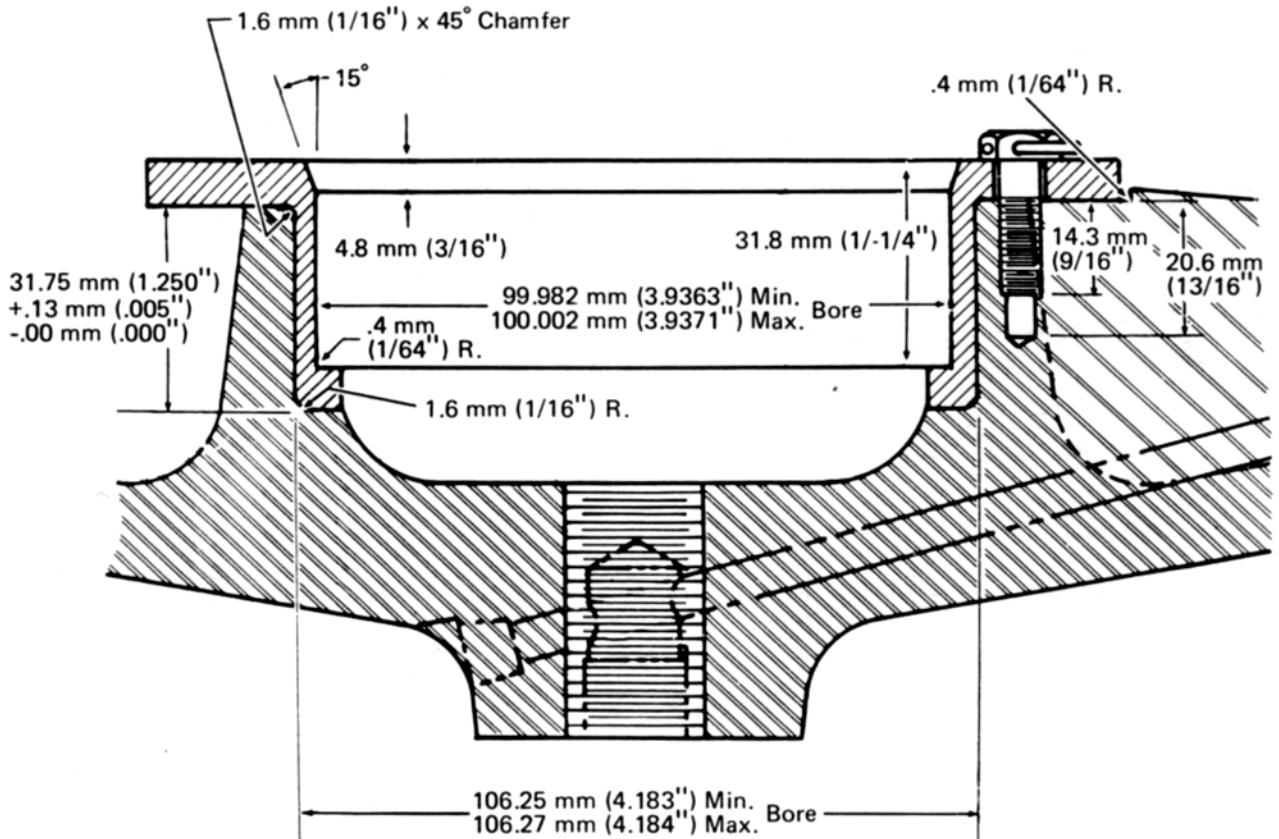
Installing Cooling Fan Pilot Bearing Insert
